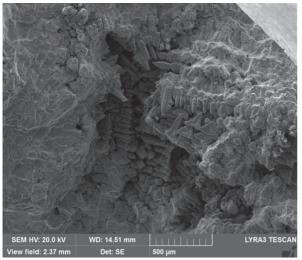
Fatigue crack initiation site at the surface in vicinity of casting defect
